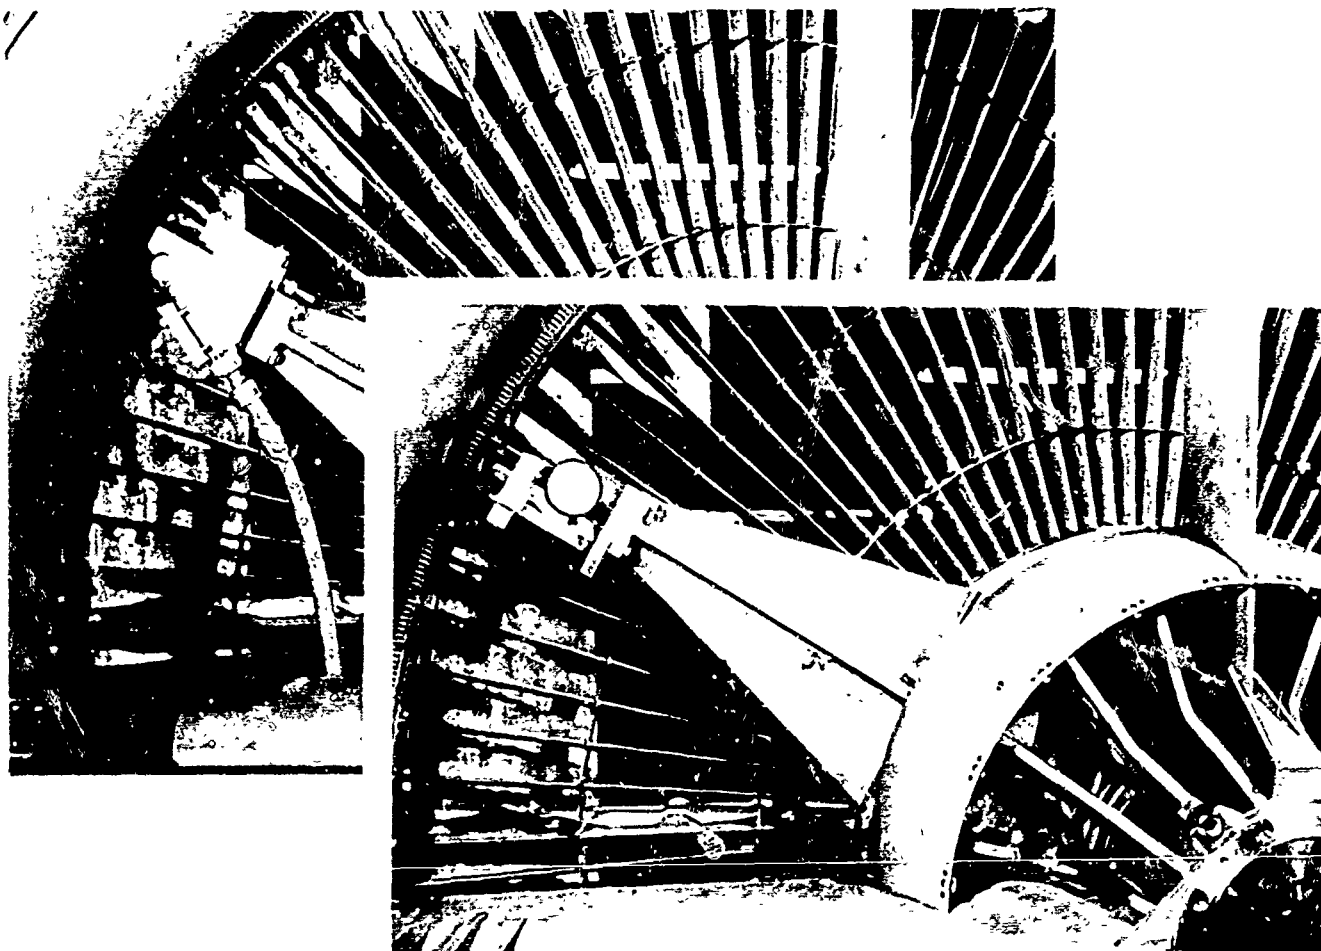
FRONT FRAME AIR SEAL GRINDING (LEFT) AND INSPECTION (RIGHT) FIXTURES
